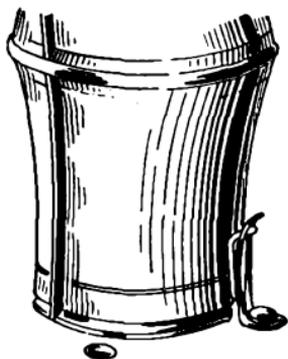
Method of grounding metal shield by single-contact spring clip.
